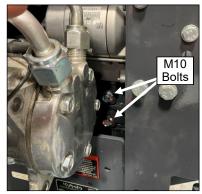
(Secure Compressor with 2 Bolts in Rear)
